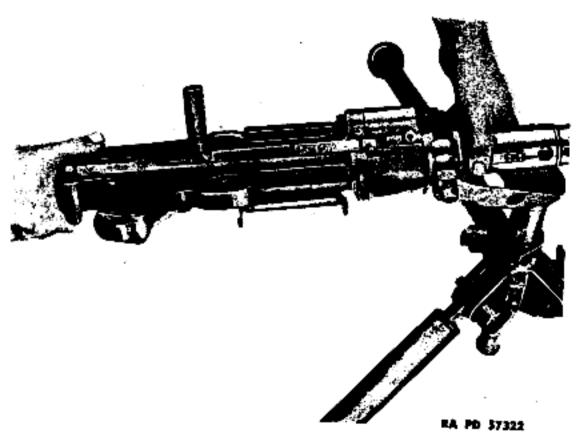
Mounting Machine Gun on Antiaircraft Tripod
